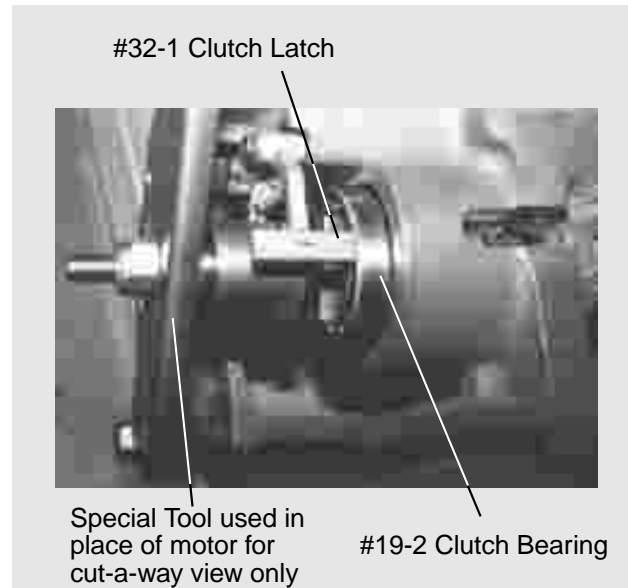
Cut-a-way view of L120-85 actuator with Clutch Latch positioned on face of Clutch Bearing
